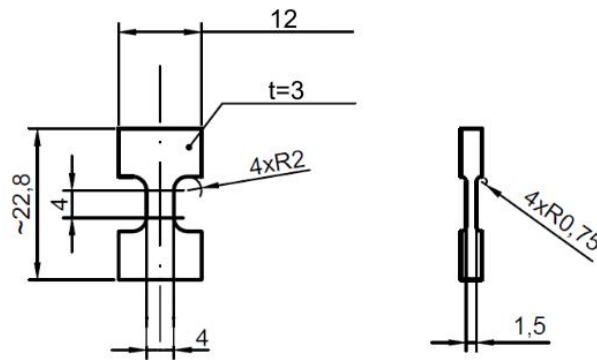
Schematic drawing of the tensile test specimen. All units are in mm.
